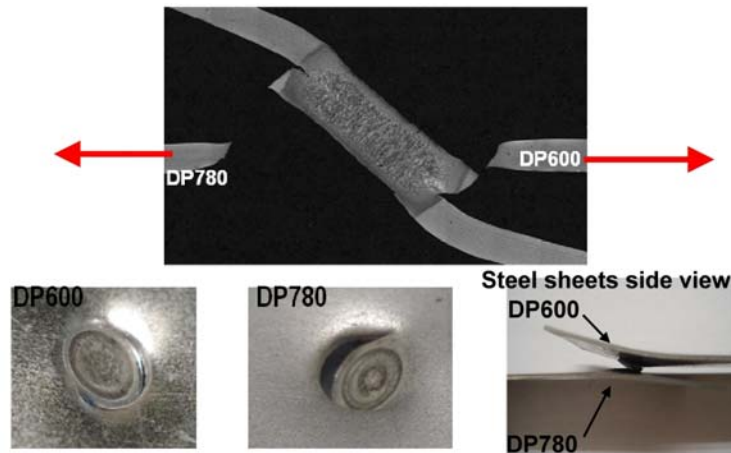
Cross-section of DP600_B-DP780_B partial lap-shear tensile test at 3.8 mm displacement of the crosshead just after final separation of the steel sheets.
